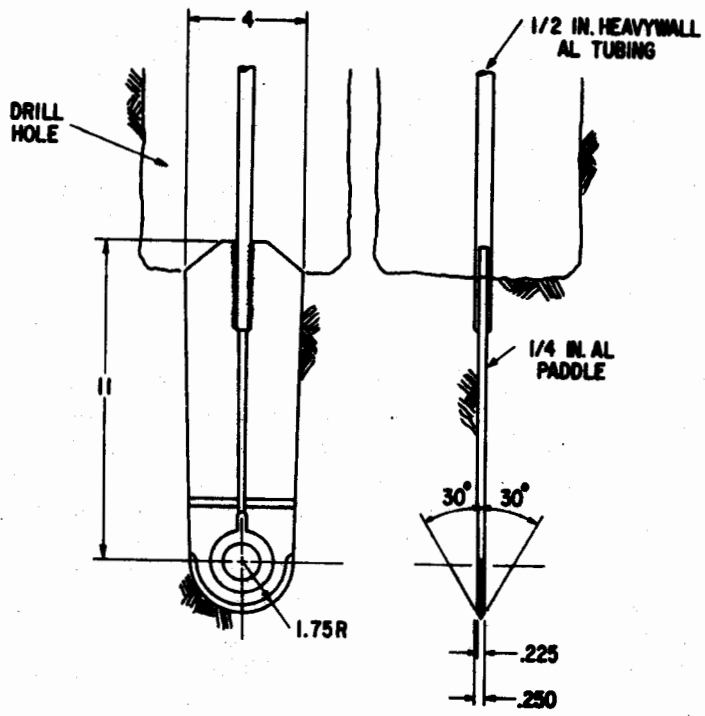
Details of WES Stress Gage and Paddle Assembly Shown in Place at Bottom of Drillhole
